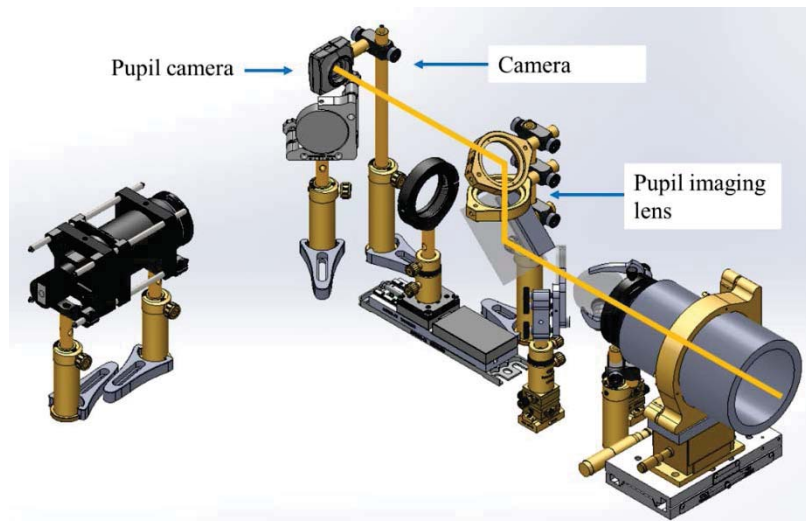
Pupil imaging pick-off path in the fixation assembly.
